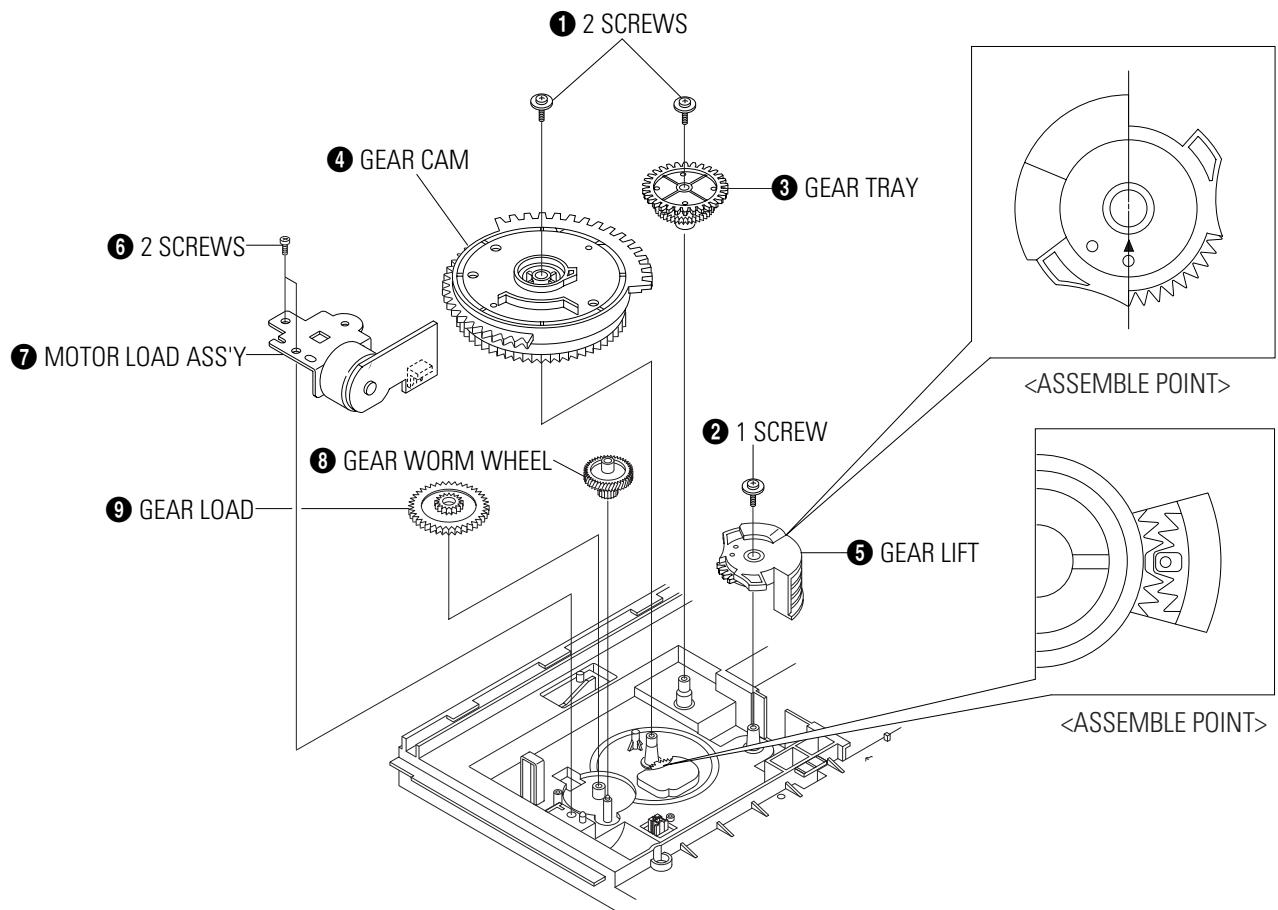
Gear Tray, Gear Cam, Gear Lift, Gear Load, Gear Worm Wheel, Motor Load Ass'y Removal
